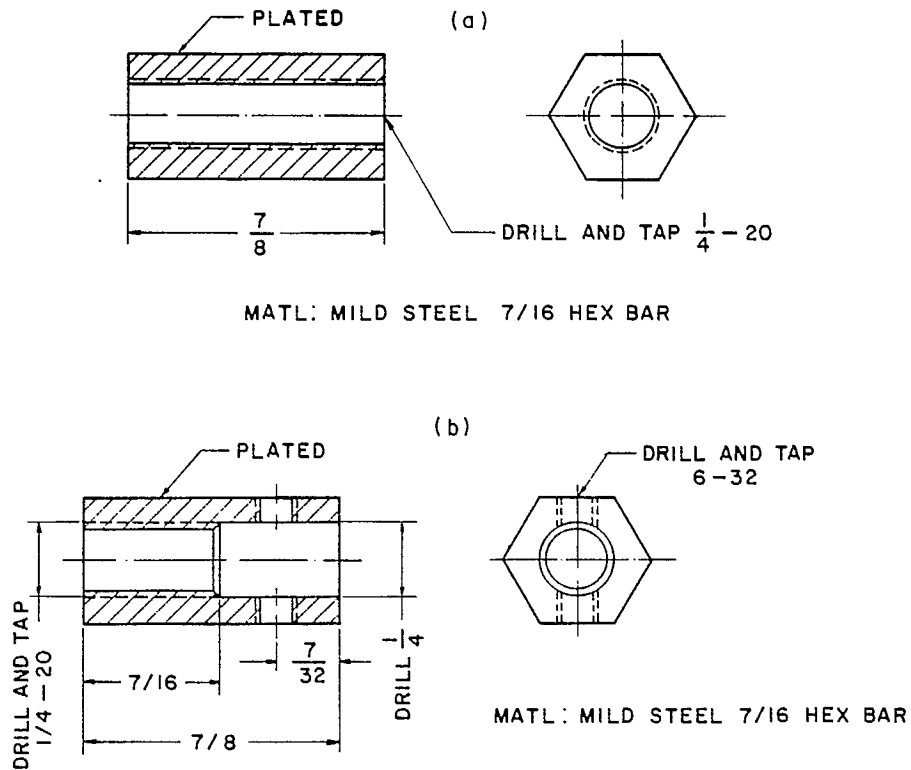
Invar rod couplers; (a) rod assembly, (b) rod to potentiometer.
